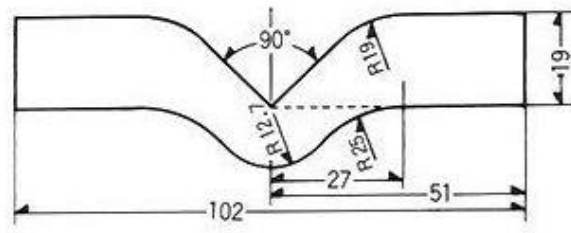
ASTM D624-C tear test specimen dimensions [36]
